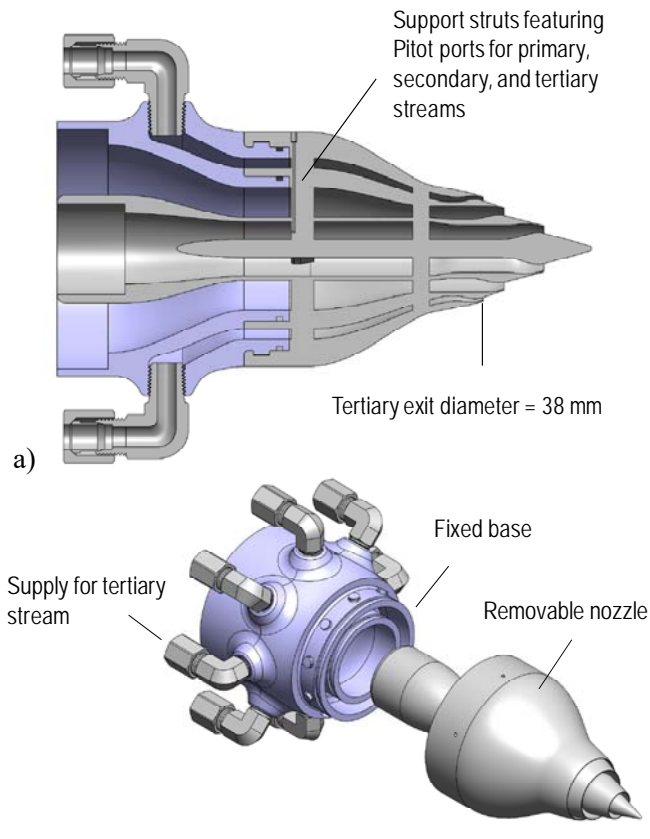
CAD views of three-stream nozzle assembly. a) Cross-sectional view and b) exploded view of three-stream nozzle.
